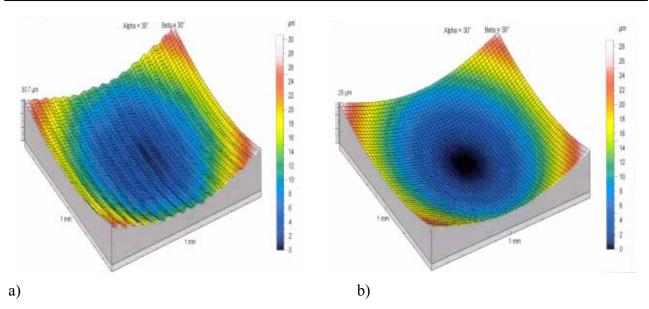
Unused acetabulum of hip joint endoprosthesis: a) general view, b) separated initial spherical surface of the radius R=14.012 mm
